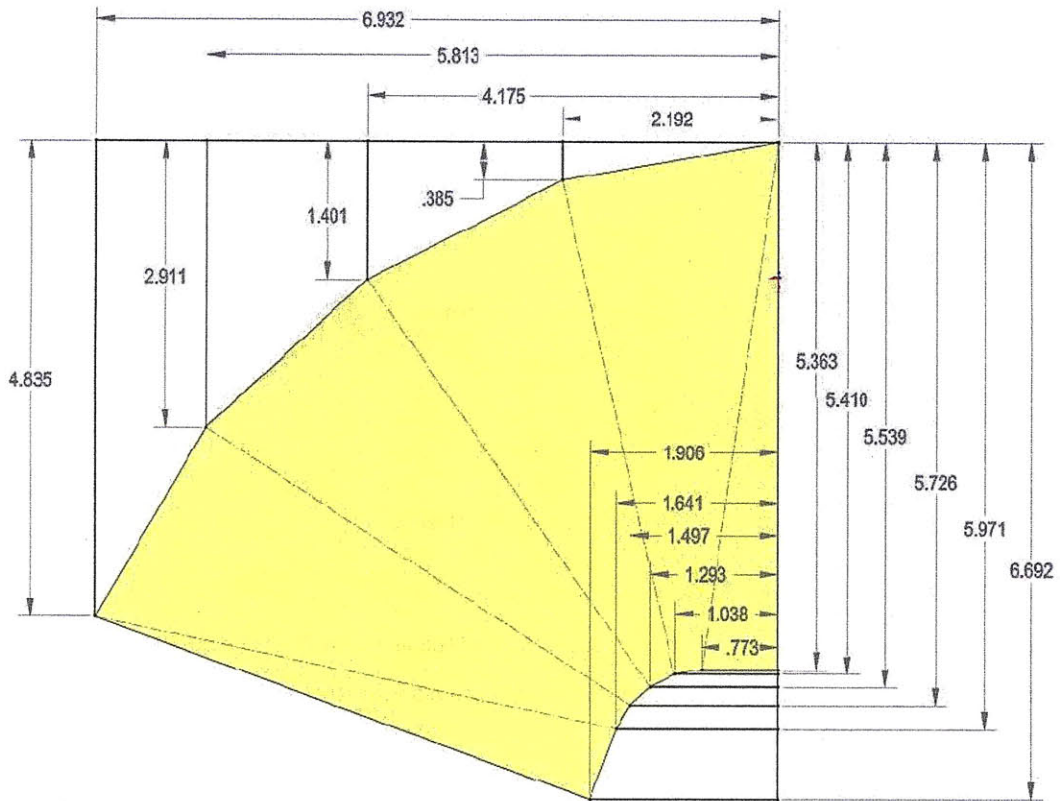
Drawing for a Planar Section of One-Half of the Folded Delrin Sheet Funnel
